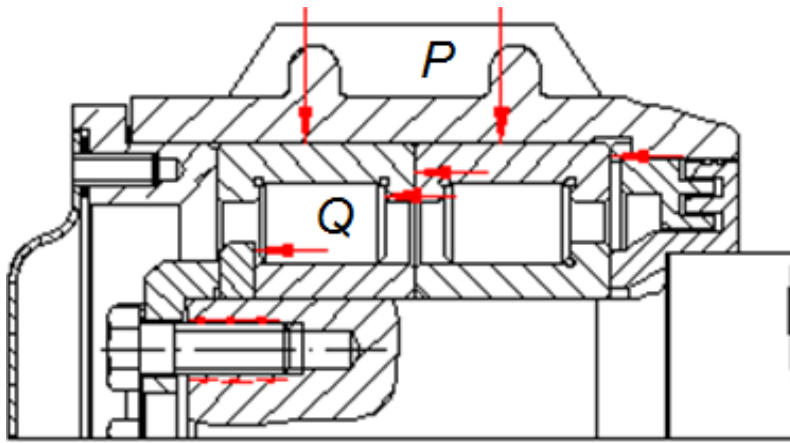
The scheme of load transfer in a bearing axlebox assembly with cylindrical bearings under the action of an axial force in the direction of the end mount
